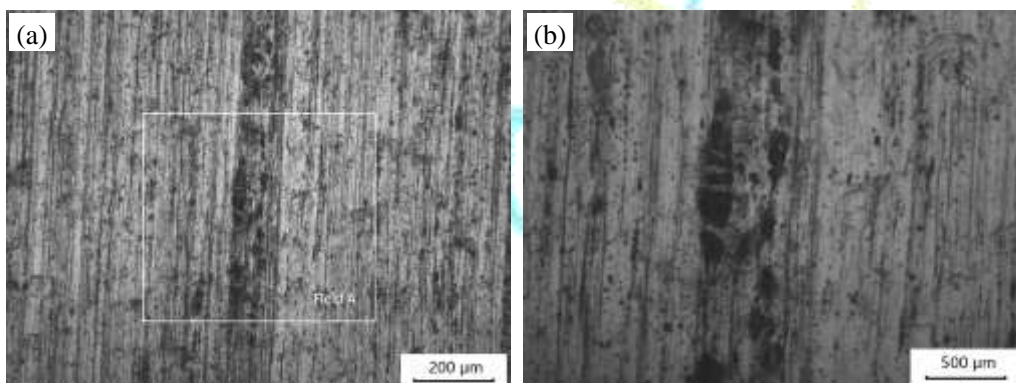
Surface appearance of Al-Mg alloy sheet with a) sliver defect, and b) magnified field A
